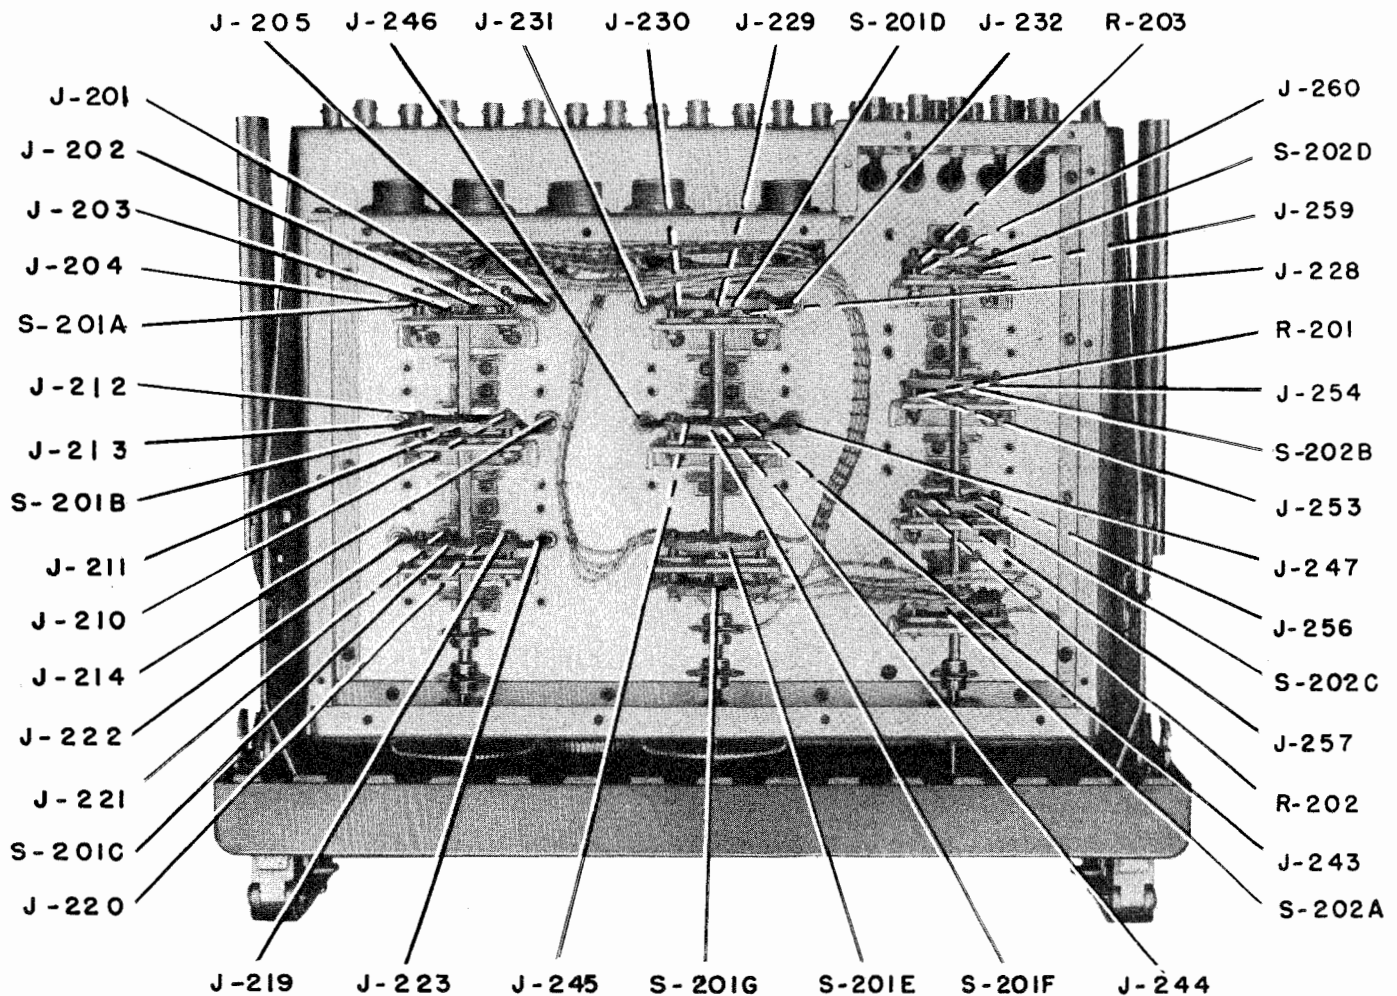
Component Locations Top of Chassis, Control Panel SB-142/FRR-24
